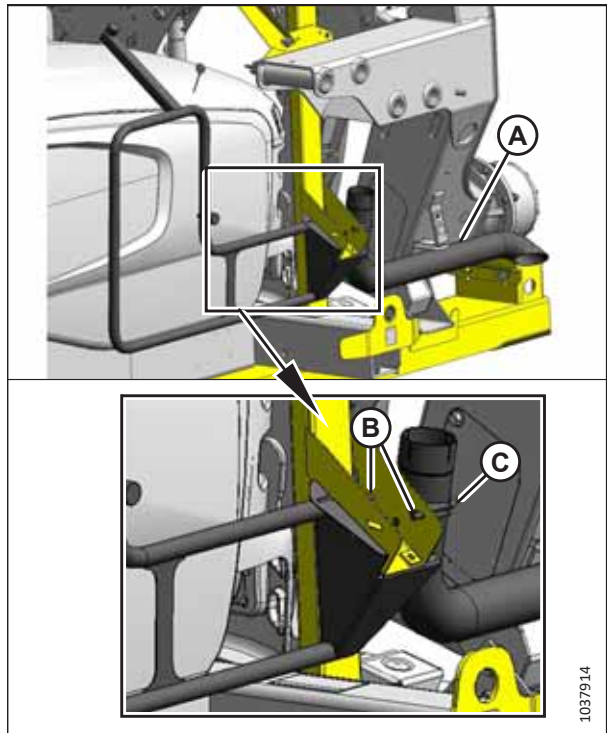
Hand Rails and Exhaust Stack Shipping Position
